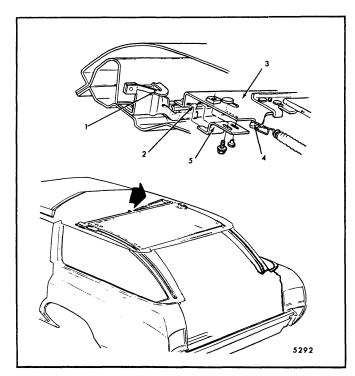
Drive Cable Flag Retainer and Window Lift Spring Details
